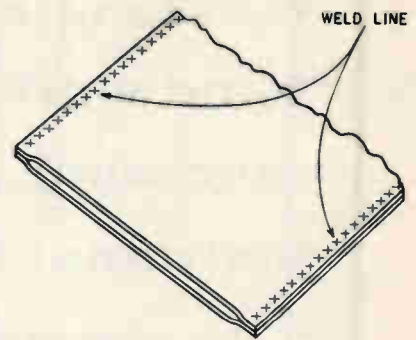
Welded strips form tubing that could be cooled by liquid in high-power transducers
